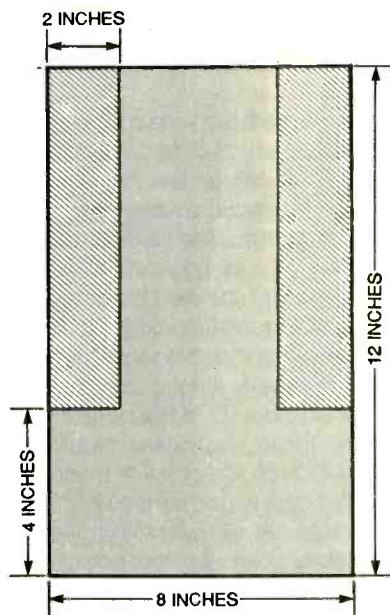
Use this template as a guide when cutting the two boards for use in the Mount.
